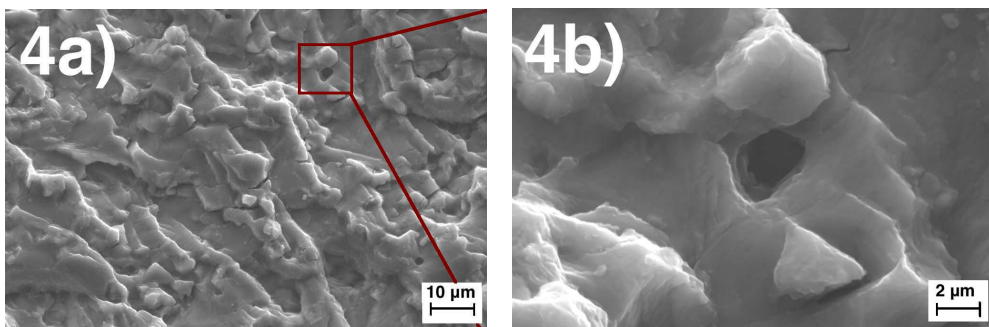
Transgranular fracture surface and microvoids of AA6082.50-T6 PWHT.
